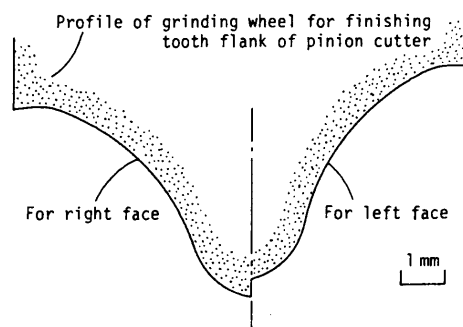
Wheel profile capable of finishing both flanks of pinion cutter
